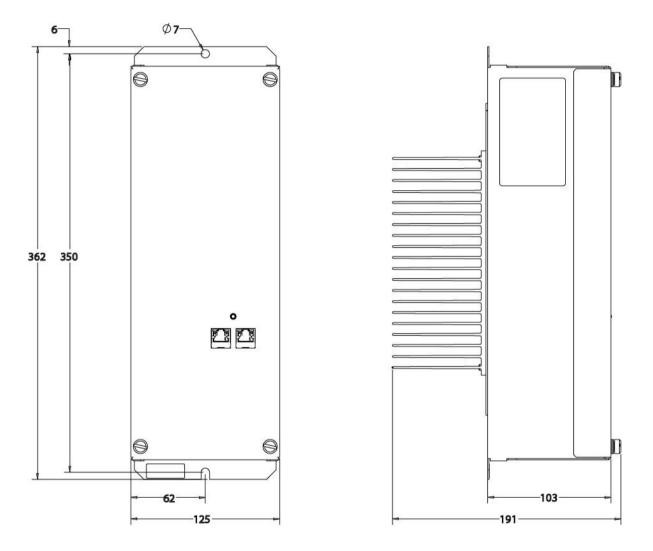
15kW and 24kW PIU dimensions Duct mount
